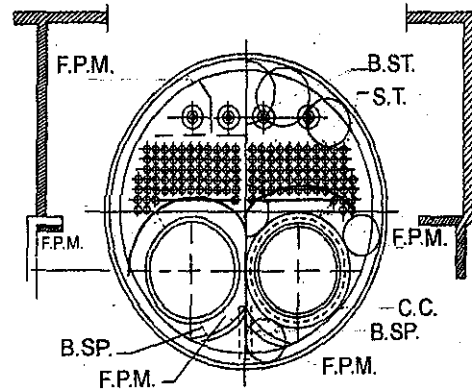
TYPICAL ARRANGEMENT OF END PLATES ON CORNISH BOILERS
